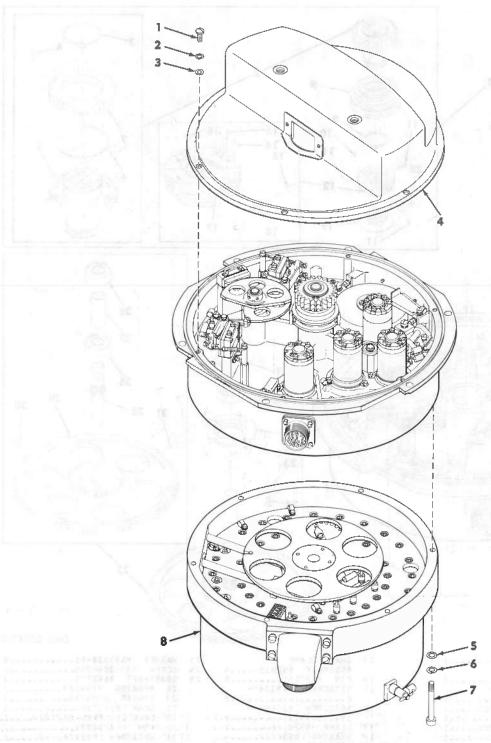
ACTUATOR ASSEMBLY /8520111/-EXPLODED VIEW /SEE FIGURES 36 AND 57 FOR NEXT HIGHER ASSEMBLY/
